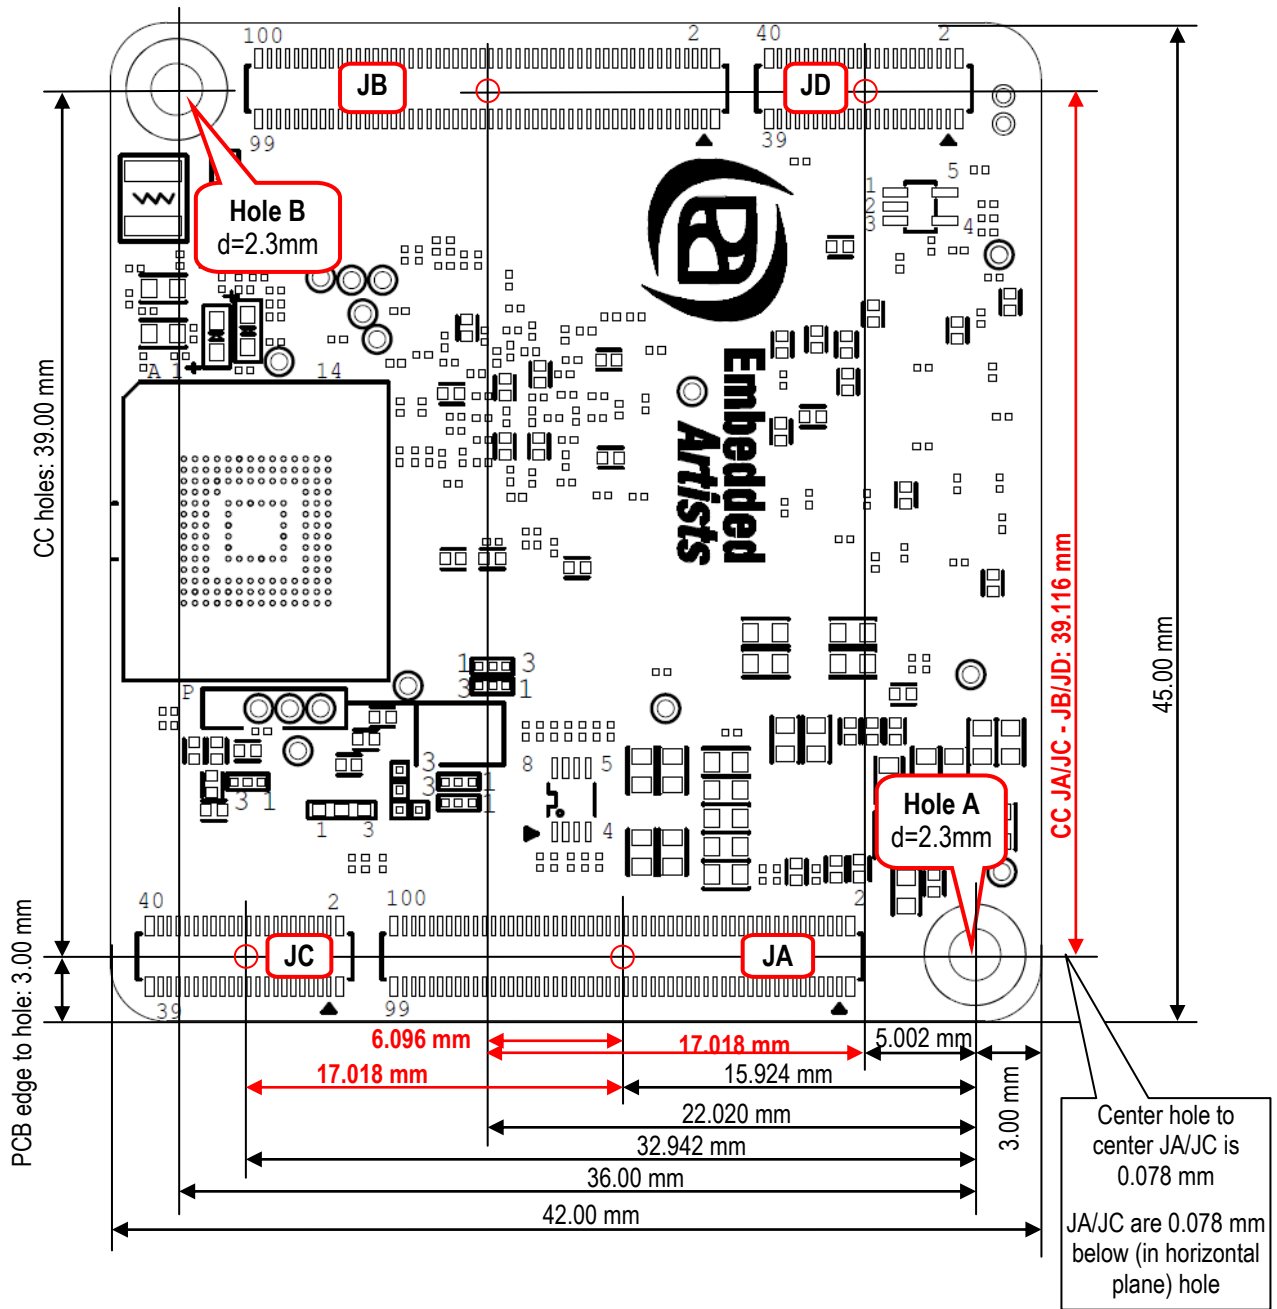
iMX8M Nano uCOM Board Mechanical Outline, View from Bottom Side
